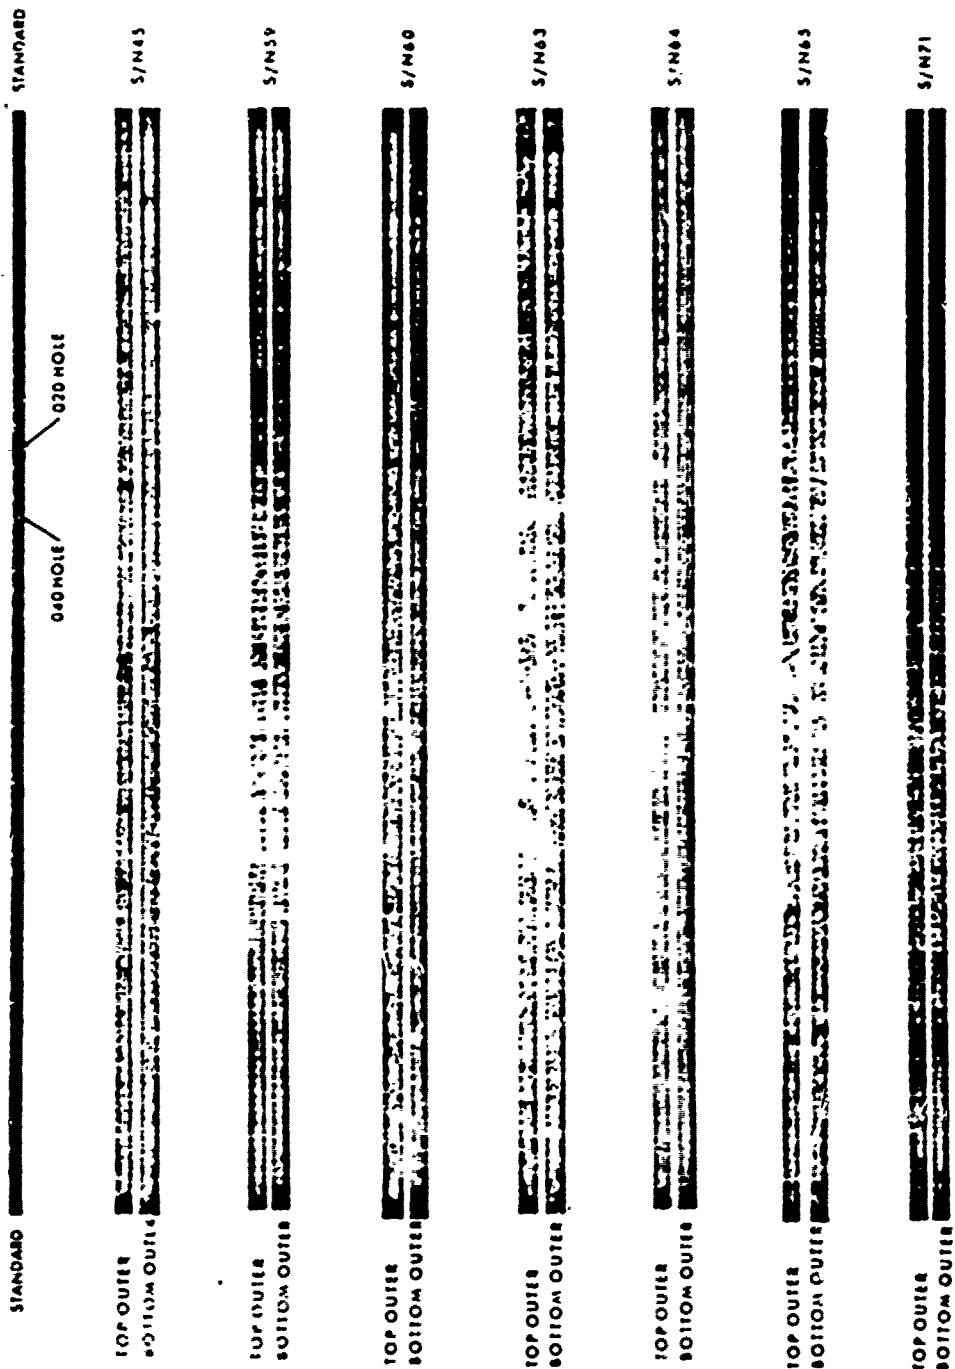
Ultrasonic Inspection C-scans, Second-row Gear Prior to Test
